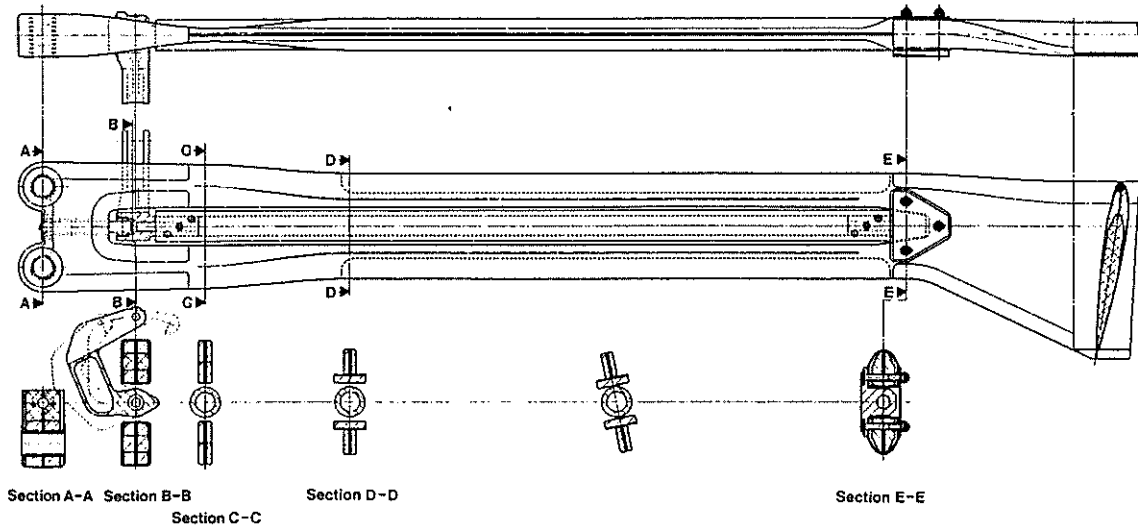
Composite Bearingless Main Rotor Design With Flexural Double Beam Element and Control Rod
